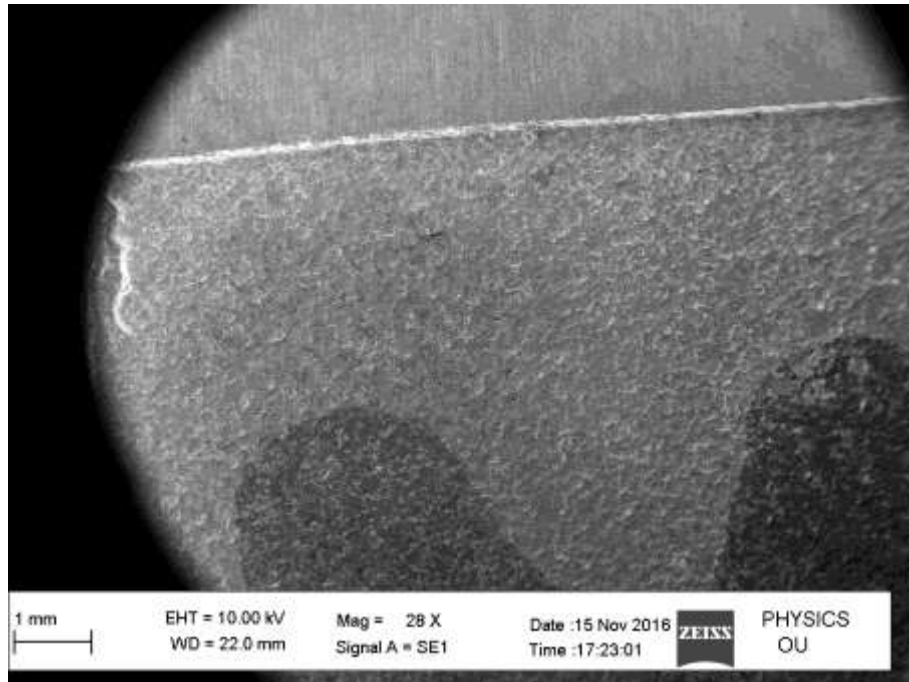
Inconel600 work piece after machining with Copper and Graphite Tool
